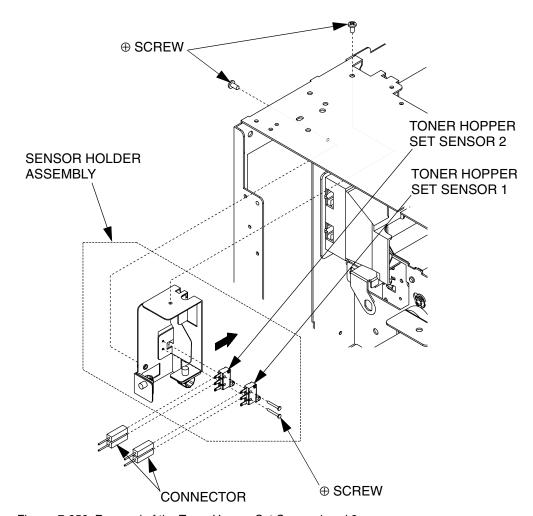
Removal of the Toner Hopper Set Sensor 1 and 2
